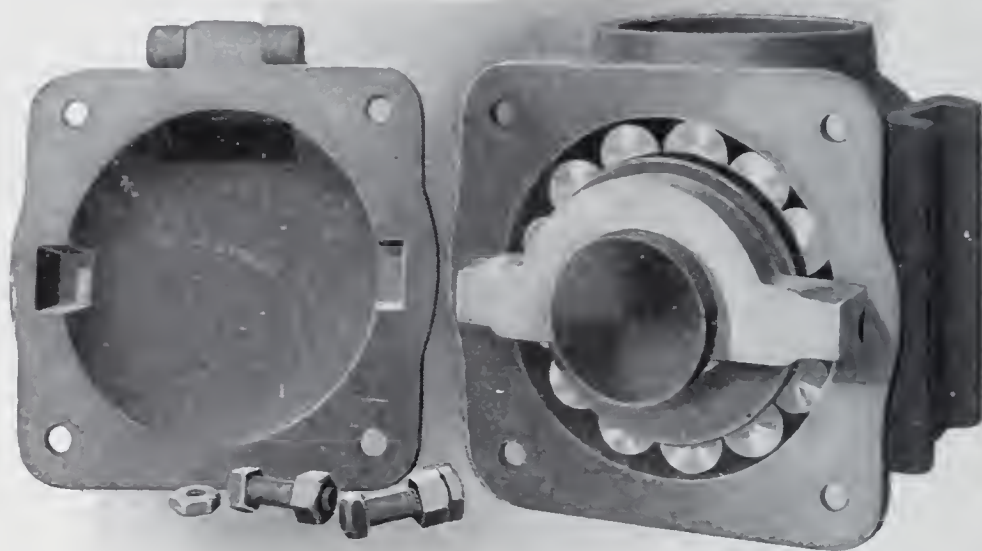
TROLLEY JOURNAL ROLLER BEARING.
